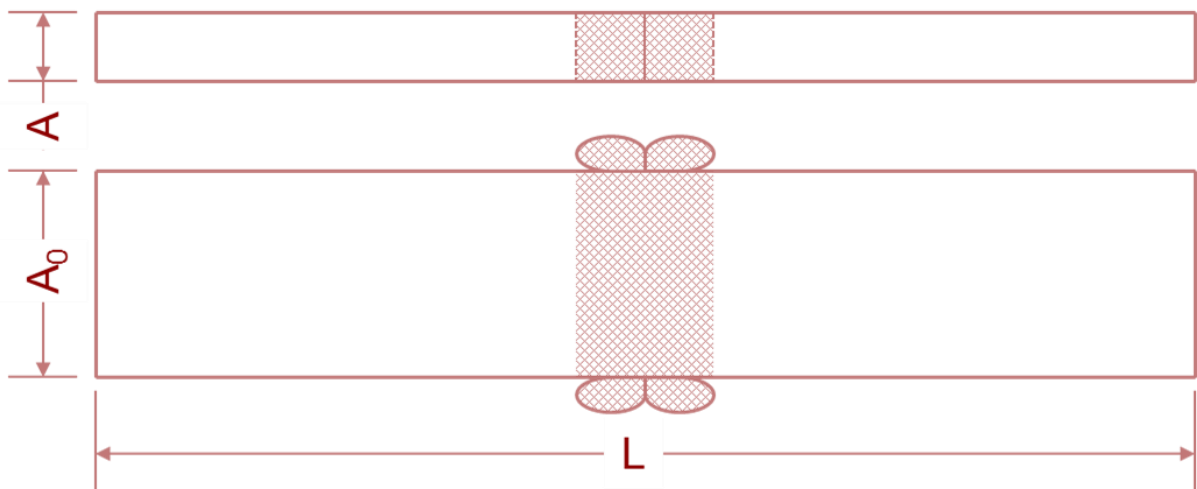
Guided side bend specimen geometry from ASTM F3183-16
